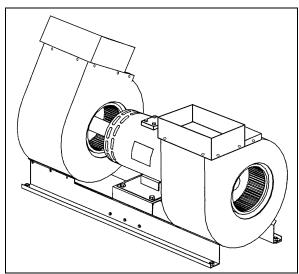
EVAPORATOR MOTOR ASSEMBLY
